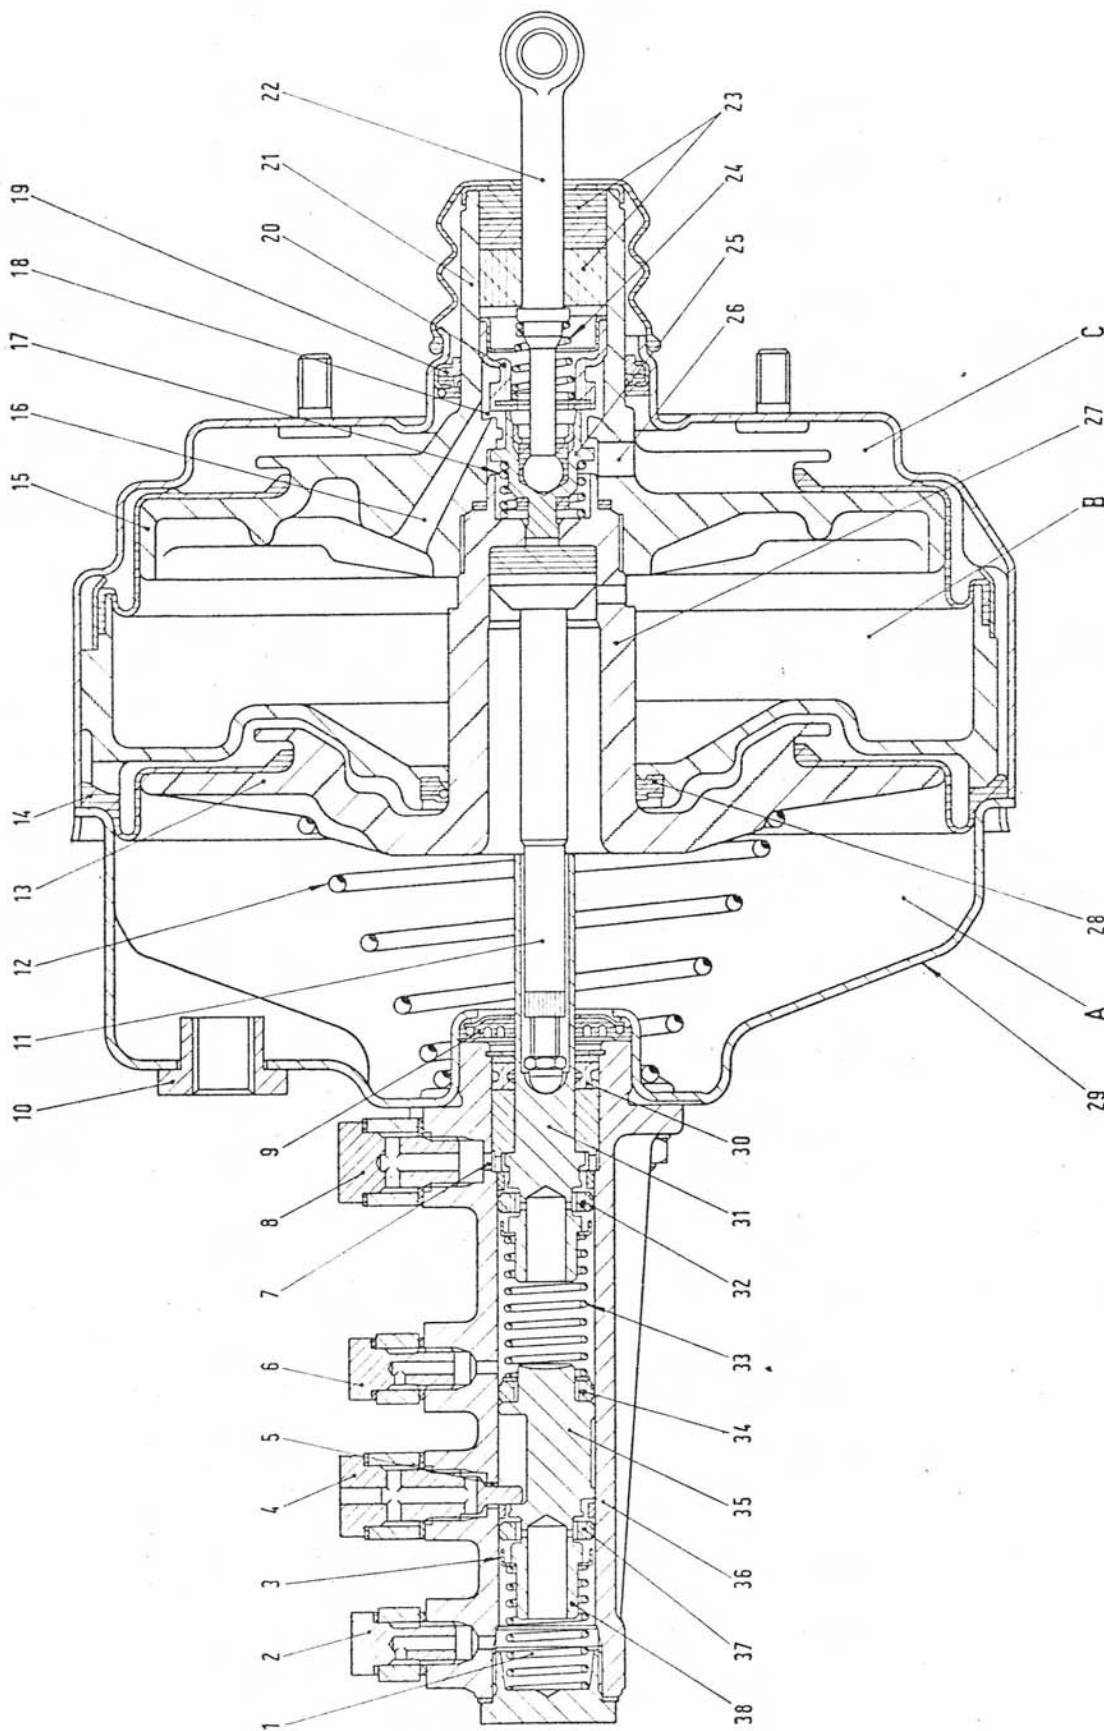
Section through Master-Vac brake booster and double-circuit master cylinder.
